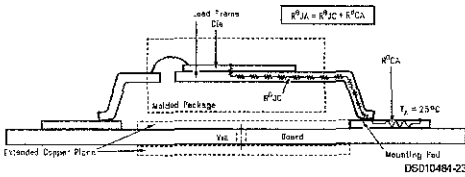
Cross-sectional view of Integrated Circuit Mounted on a printed circuit board. Note that the case temperature is measured at the point where the leads contact with the mounting pad surface
